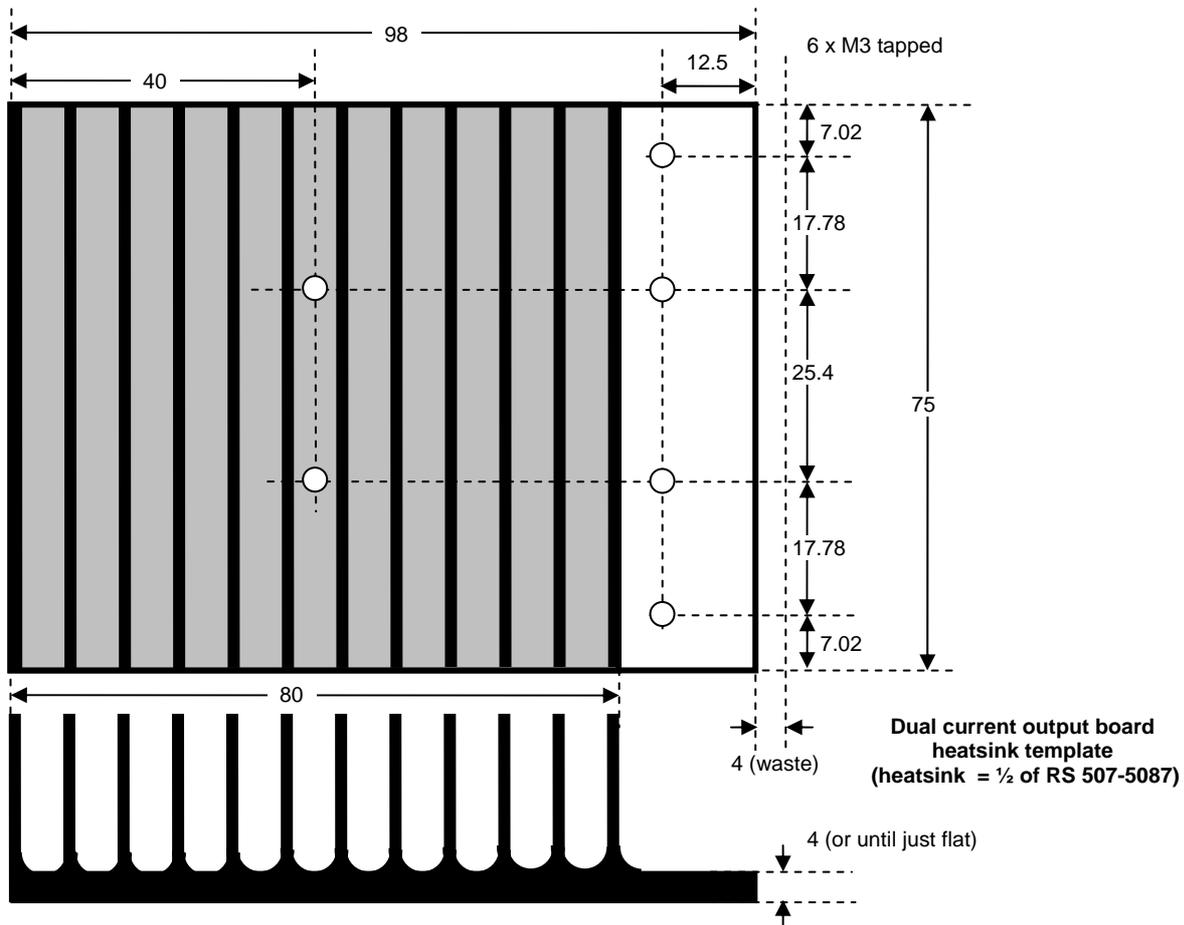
Dimensions of the ‘cut-down’ heatsink used in the constant current power supply board
